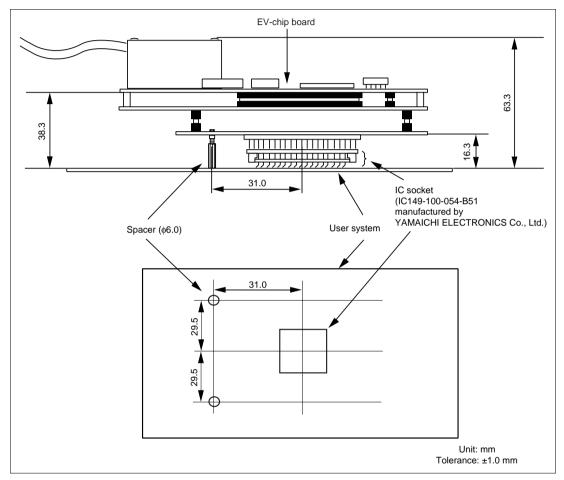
Resulting Dimensions after Connecting User System Interface Board
